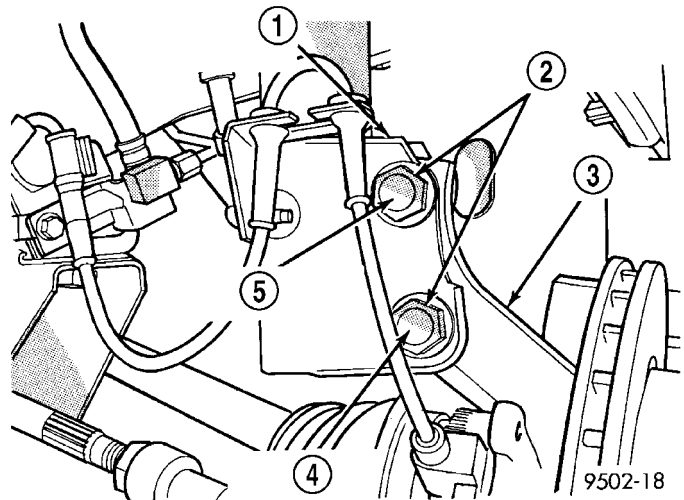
Front Strut Clevis Bracket Attaching Bolts
